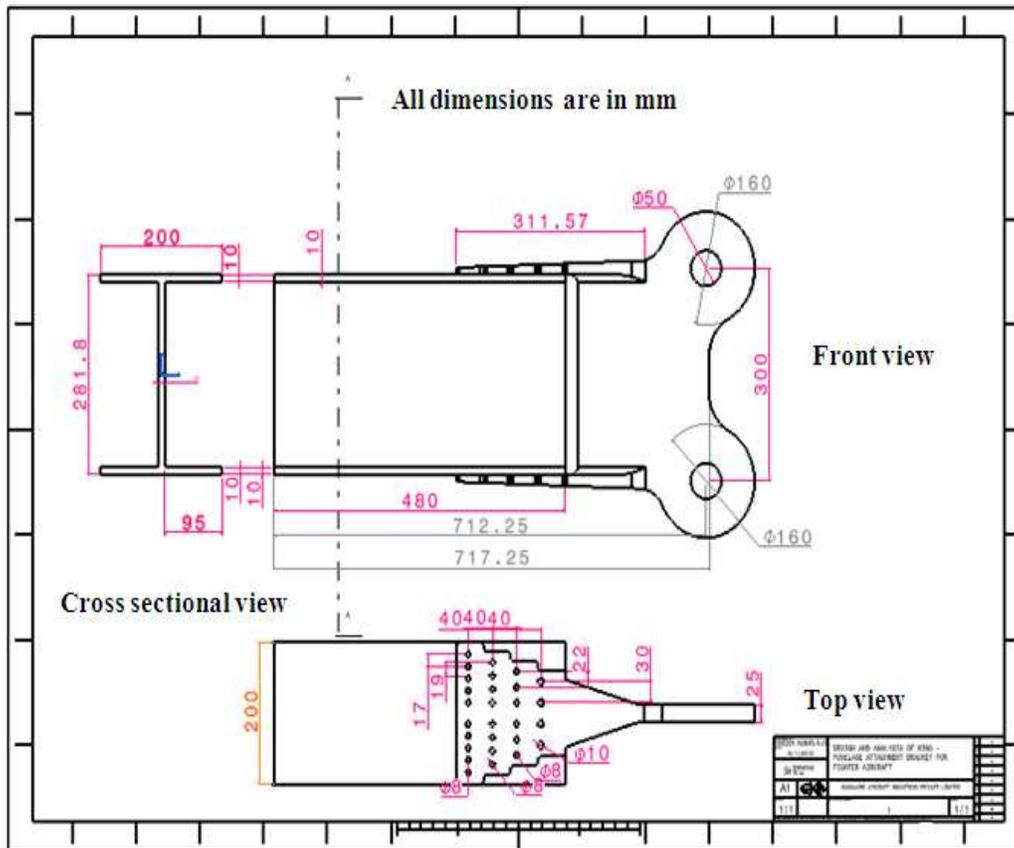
2-D views of the wing- fuselage attachment bracket.
